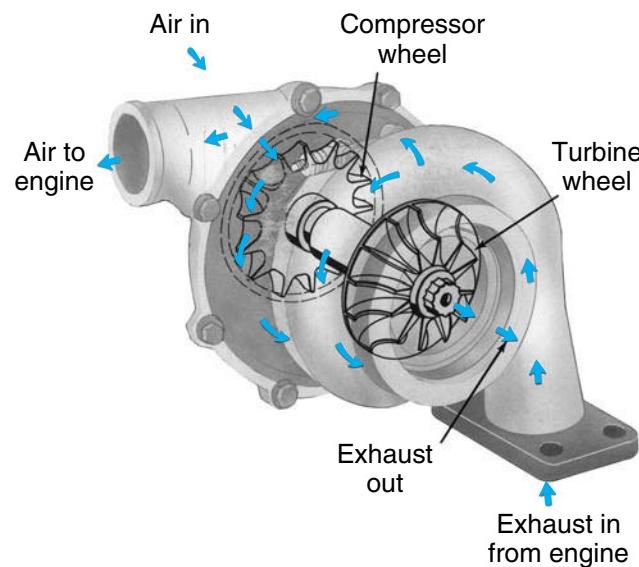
Gas flow through a turbocharger. (Courtesy of Schwitzer Engine Components, Schwitzer Group)
